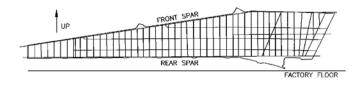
A380 Wing Box as Oriented in Assembly Jig - Elevation
